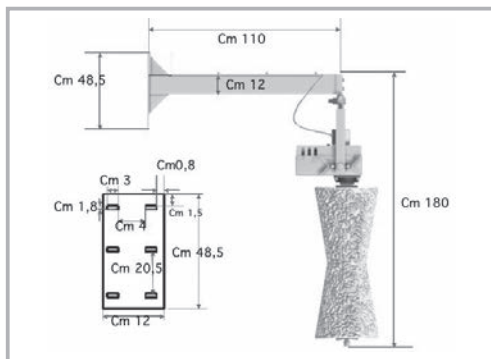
CowCleaner Swing : with particular plate for wall mounting
